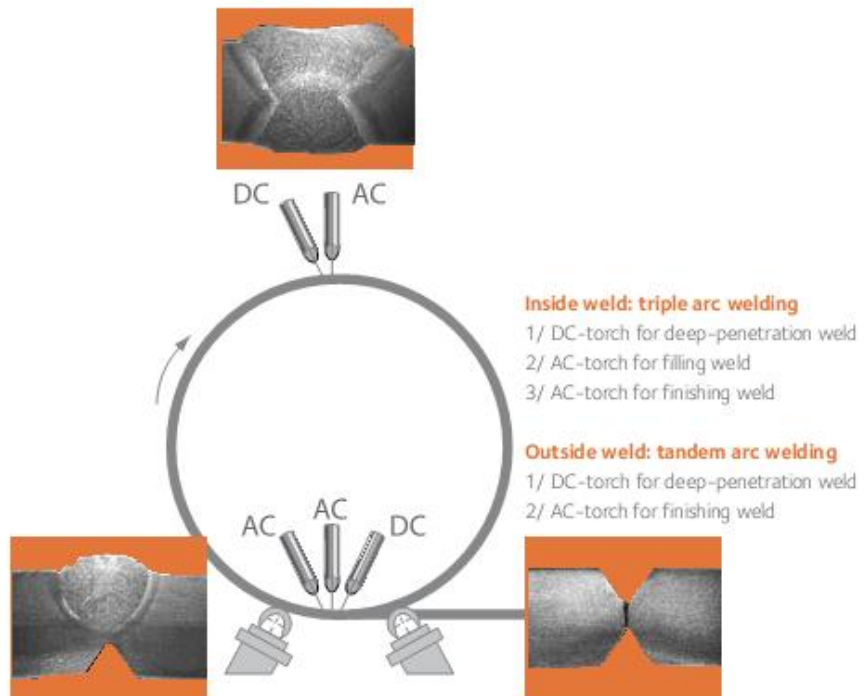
Inside and Outside Multi arc welding [2]
